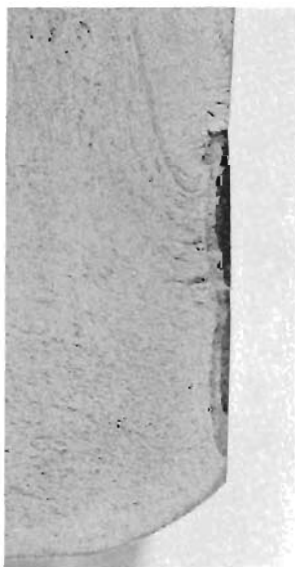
Spur gear. External rupture originating from a grinding check. (See Fig. 3-5 and 4-50.)
